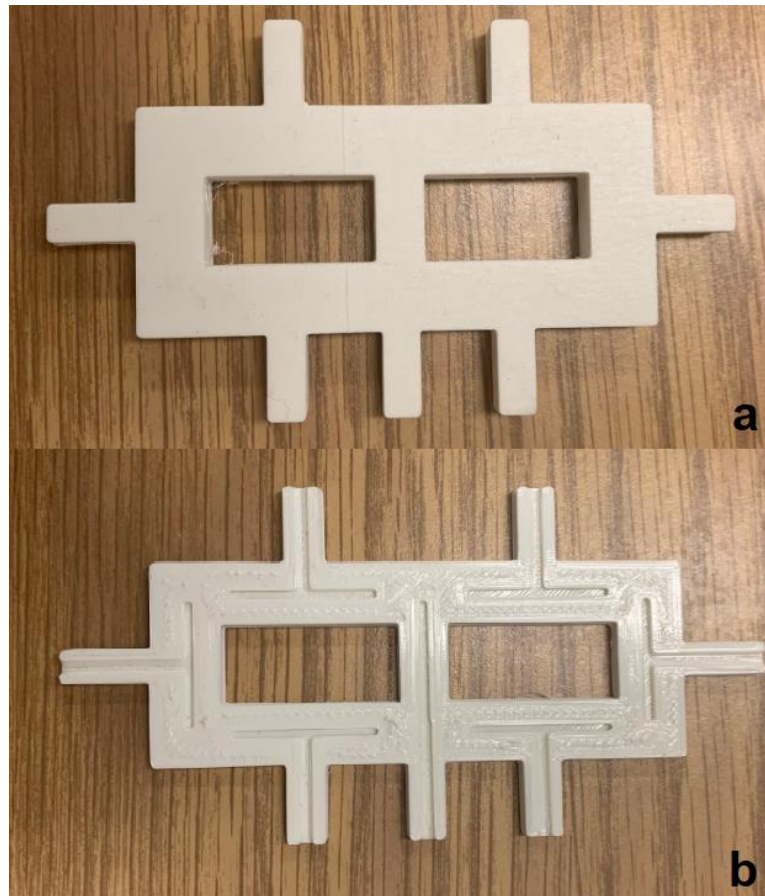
a) Complete 3D Printed segmented actuator model b) 3D Printed segmented actuator model with visible chambers.
